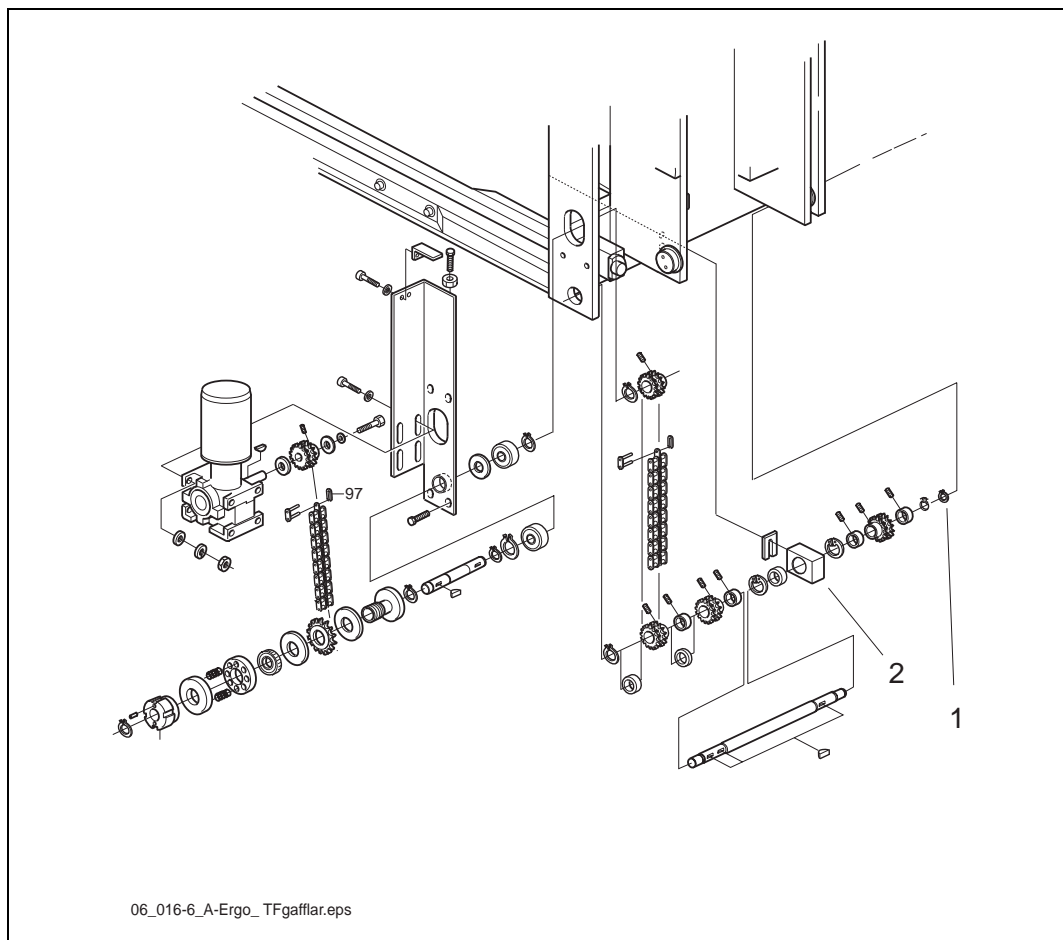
Outer circlips for side bearing and intermediate bearing
